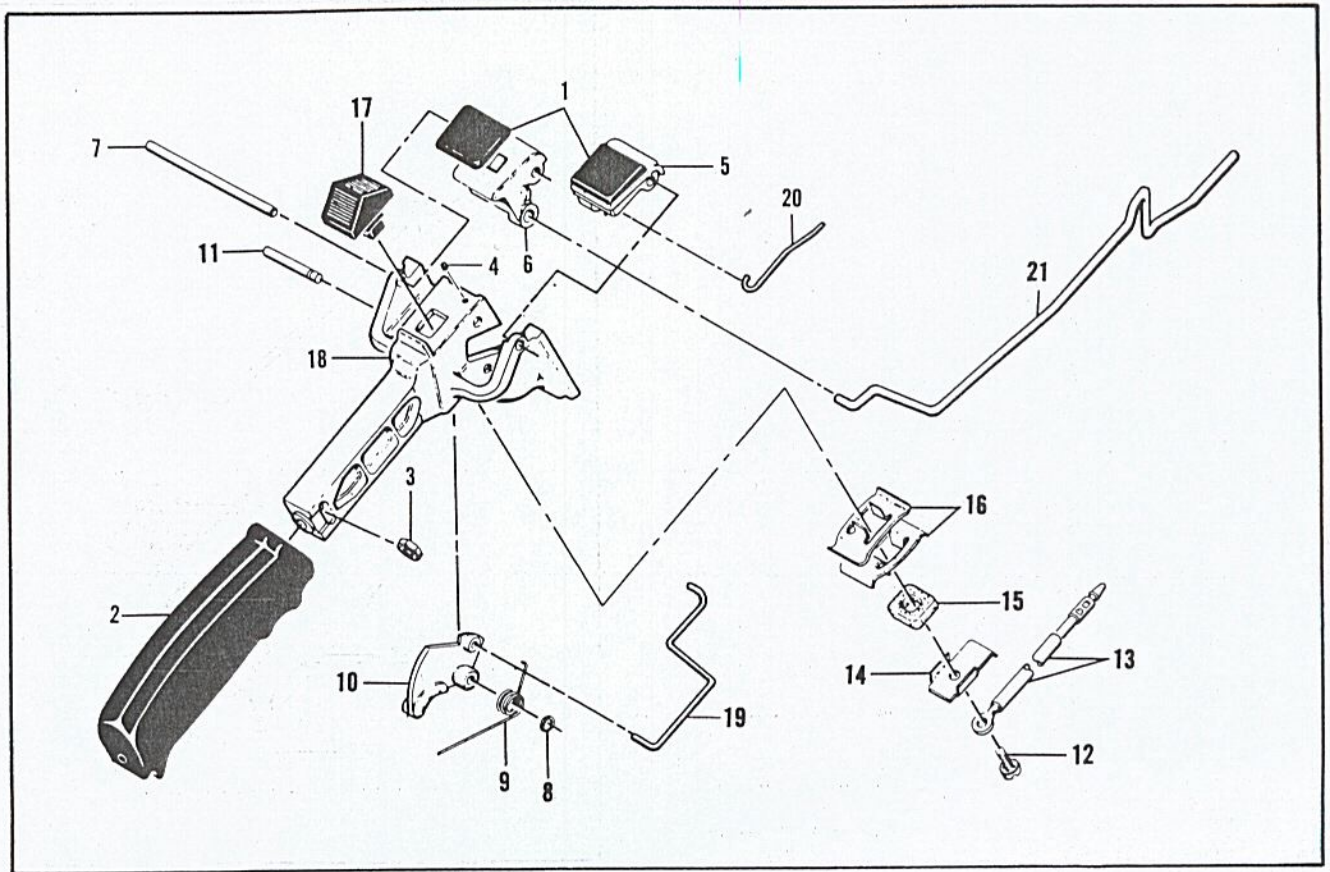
HANDLE AND CONTROL ASSEMBLY
